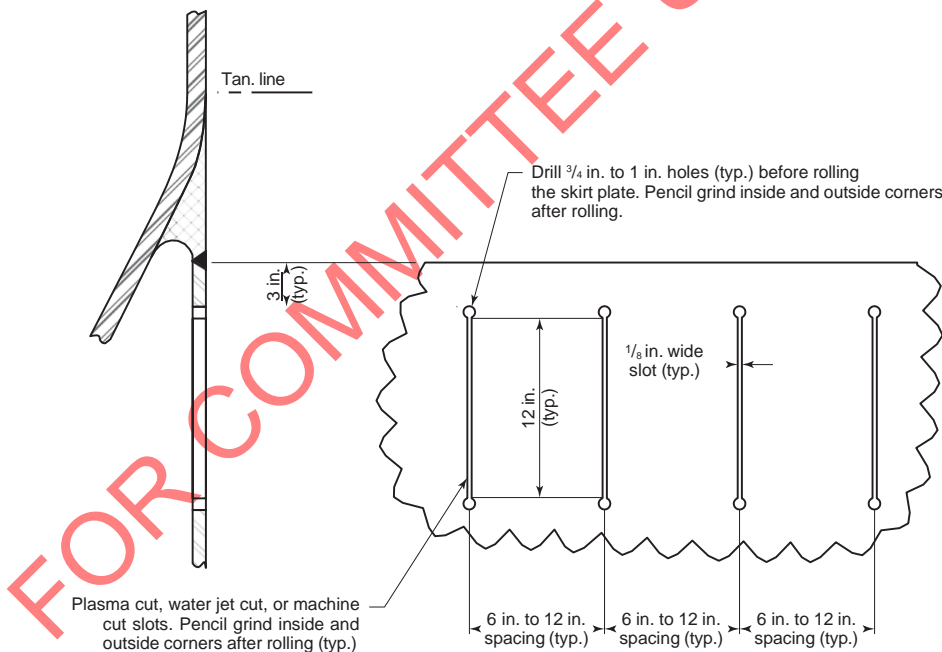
Typical Details for Coke Drum Skirt Keyholes
